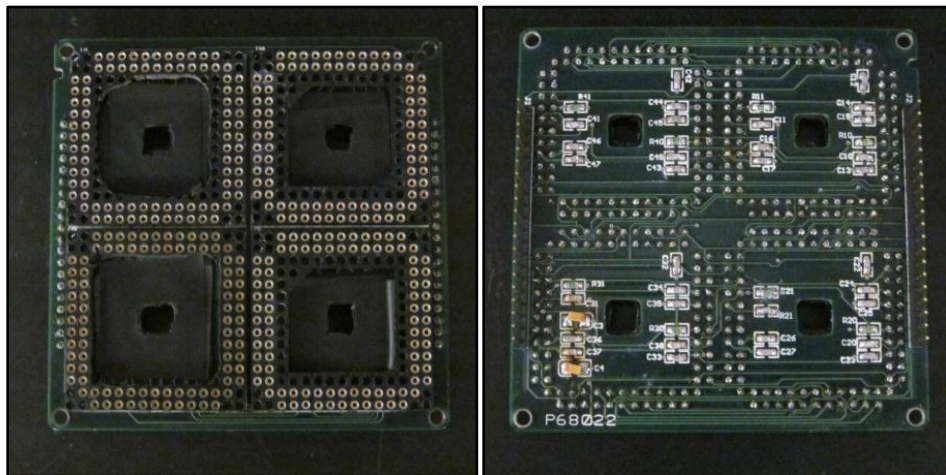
New compact detector carrier board. The front of the board (left) had sockets which held the CZT modules. The four holes in the center of each socket allowed for the heat sink to pass through. The back of the board (right) had electrical components and connectors which fit into sockets on the signal routing board.
